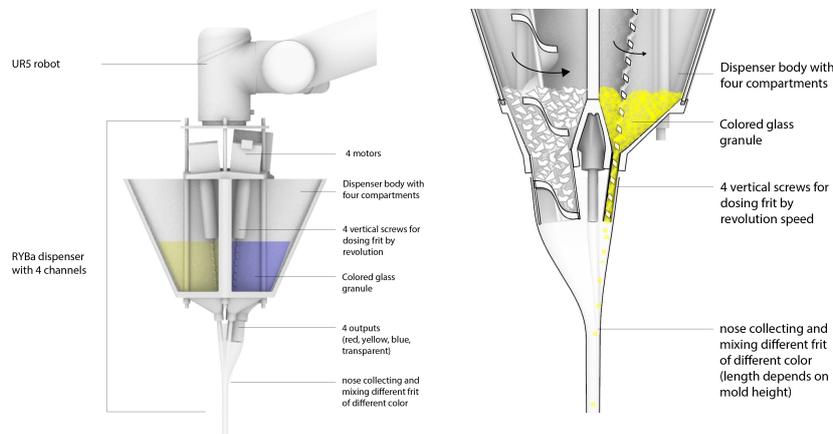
Multi-channel tool (left) elevation and detailed section (right).
